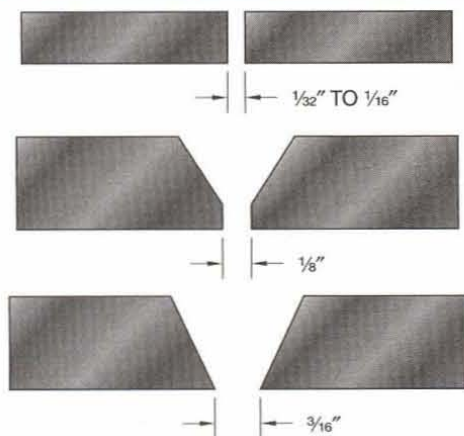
Proper root opening size is required in order to make a sound weld. The root opening size is determined by the wall thickness of the metal.
